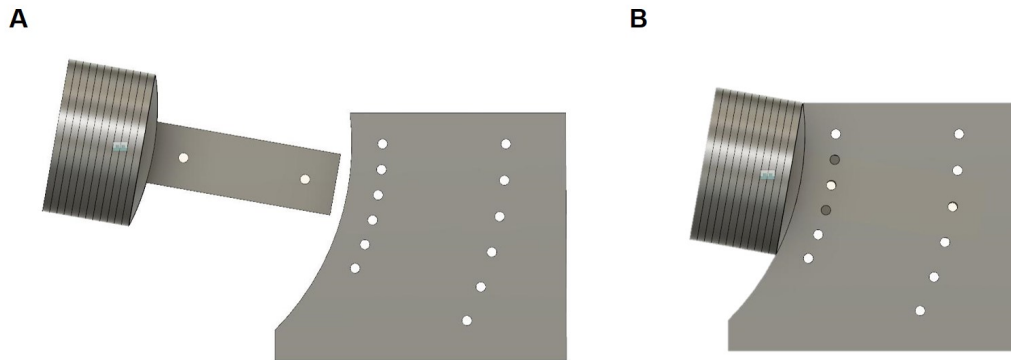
A) Separate and B) completed views of the angle mount and specimen potting fixture. The specimen potting fixture was created from epoxying laser-cut 1/4" piece of acrylic plastic. The hollow rings allowed for a hollow cavity to clearance fit a 4" OD piece of PVC pipe (used for specimen mounting). The bottom piece, rectangular extender, and curved fit pieces enabled the fixture to sit comfortably on the cove design of the angle mount. The strategically-placed clearance fit holes allowed for manual placement of the specimen in one of five discrete flexion postures: 0, 5, 10, 15, and 20°.
